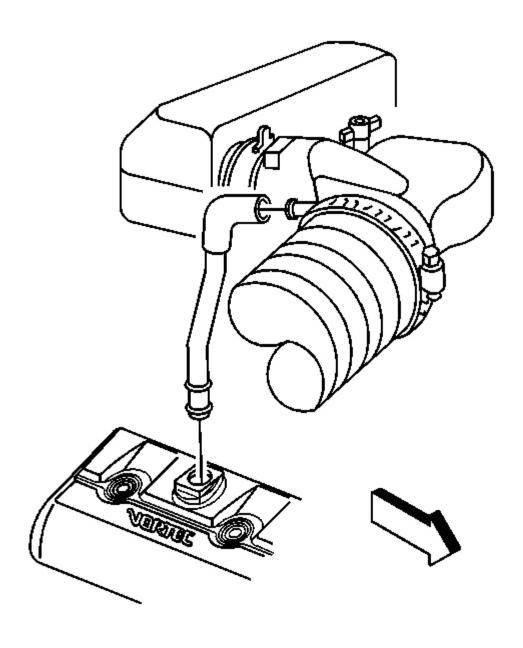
Identifying PCV Hose Courtesy of GENERAL MOTORS CORP.
